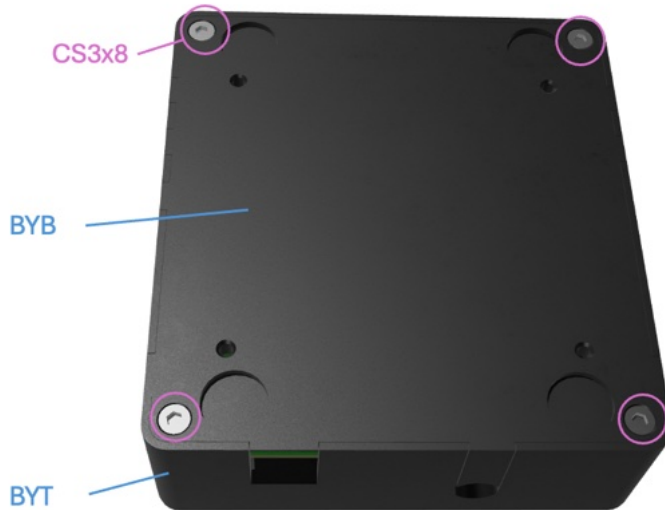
Main circuit board V3.0 housing “free-standing” assembly step 2.
